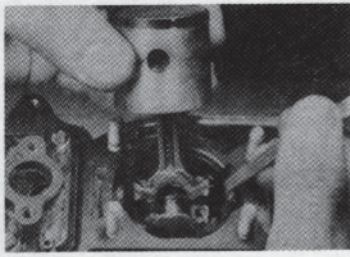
Installing piston and connecting rod assembly using locally made tool to hold rod cap in position. Tool can be made from flat strip of metal. Using grease, stick 14 rollers in cap and 14 rollers in rod; make sure that match marks on rod and cap are aligned.
